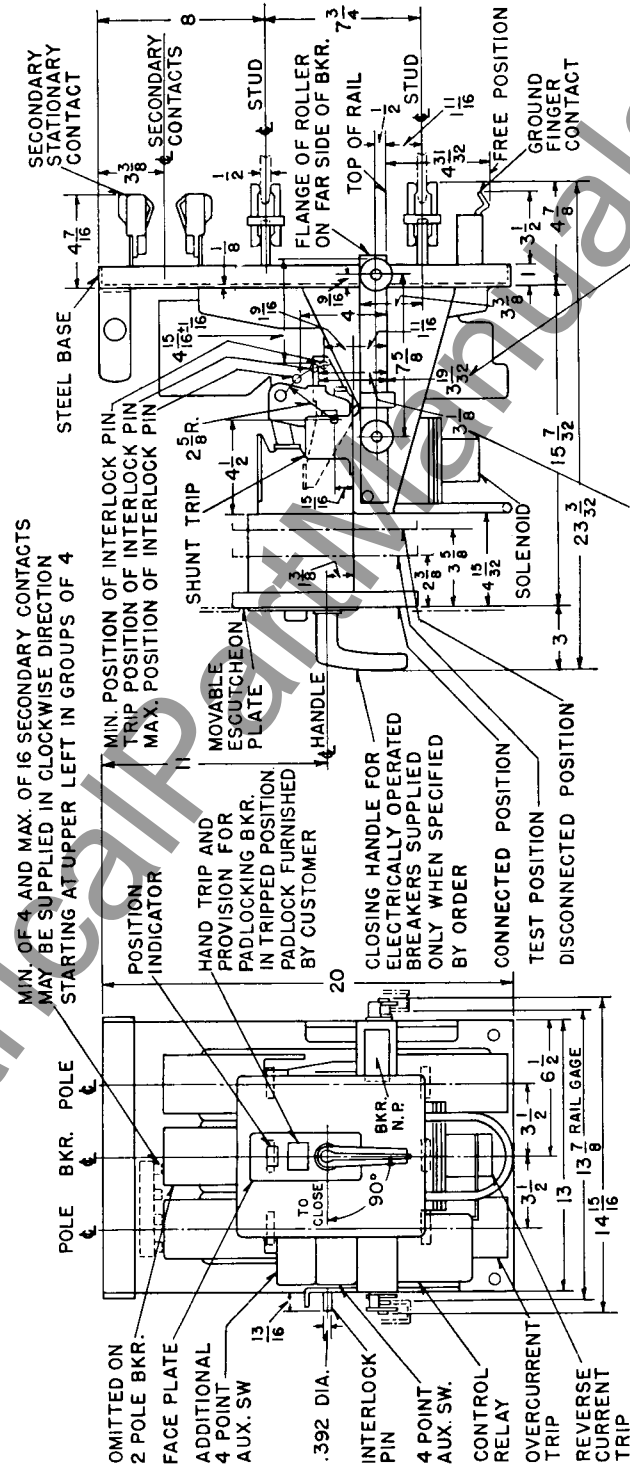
A. Type DB-25, 3 Position Drawout Outline Dimensions
